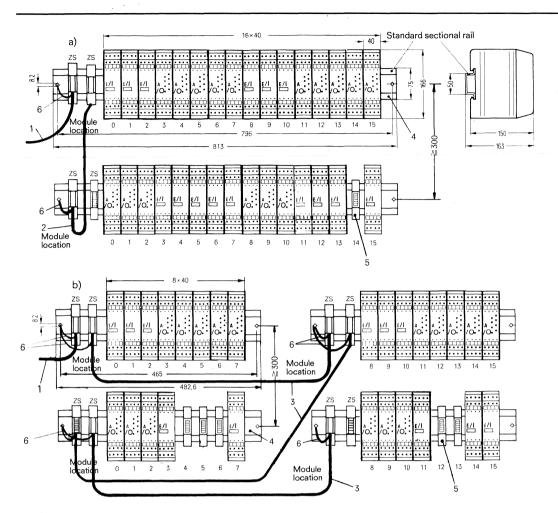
I/O module configuration for one CPU connector a) With extra-long mounting racks b) With short mounting racks 1 Cable to central controller, 2 Cable between two extra-long mounting racks, 3 Cable between two short mounting racks, 4 Mounting rack, 5 Socket connector, 6 Earth connection (M_{ext})
